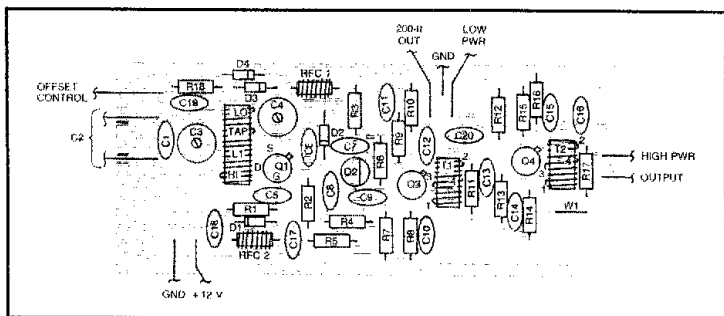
Part-placement guide for the VFO. Parts are placed on the nonfoil side of the board; the shaded area represents an X-ray view of the copper pattern. Component outlines are not necessarily representative of the shapes of the actual parts used.
